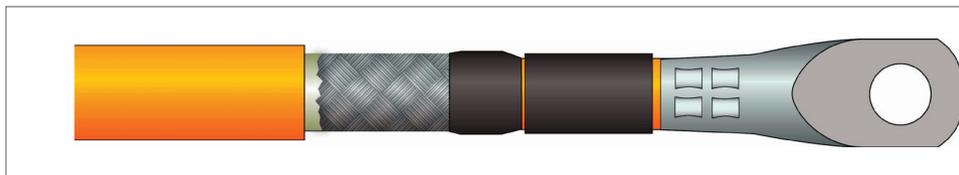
Step 7: Sliding the shrink sleeve over the cable and attaching the ring terminal
